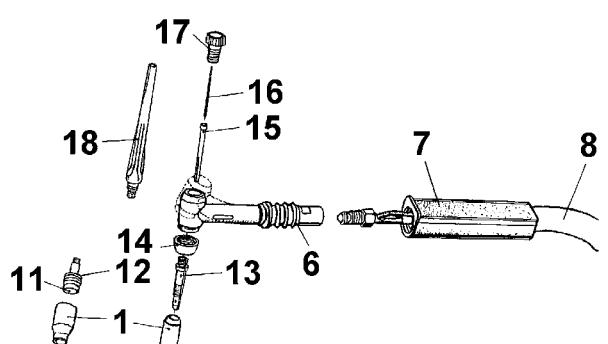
Torch for tungsten inert gas arc welding
